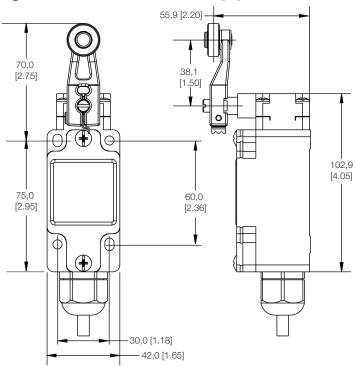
GXA Series Side Rotary Adjustable Dimensions (refer to Figure 2 for additional
